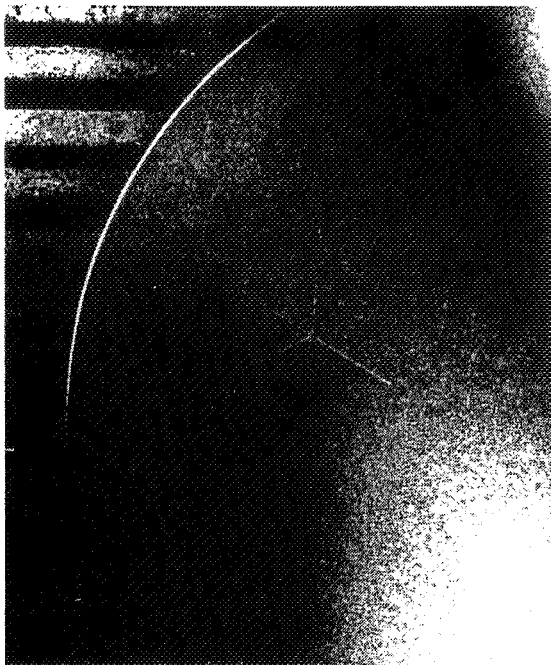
Crow's-foot fracture from burr on vacuum chuck.
